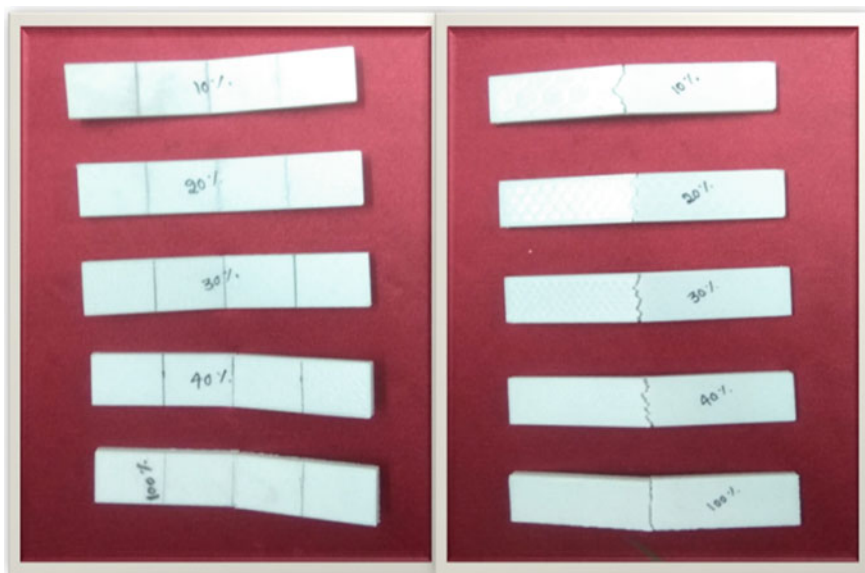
Failure of 3D printed specimens of different infill densities, top view and bottom view
